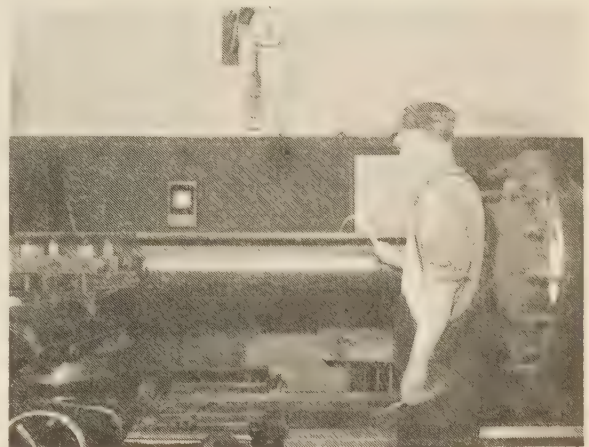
COMPLETED SHAFT BUILT UP BY METAL-SPRAYING STAINLESS STEEL
